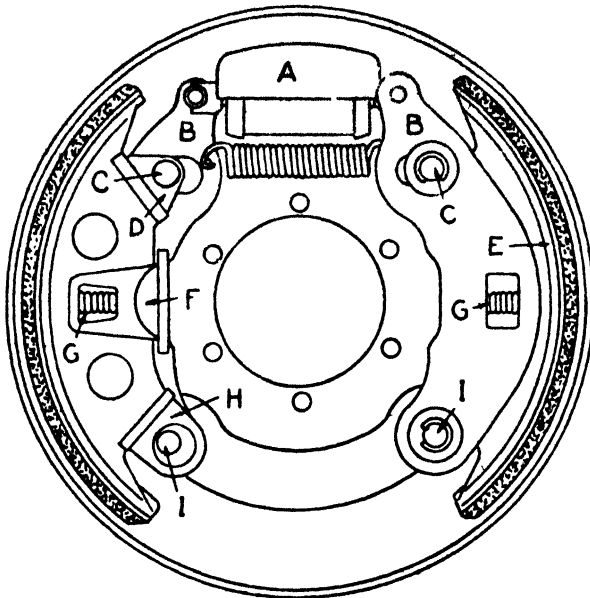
TIMKEN DP BALANCED BRAKE.
